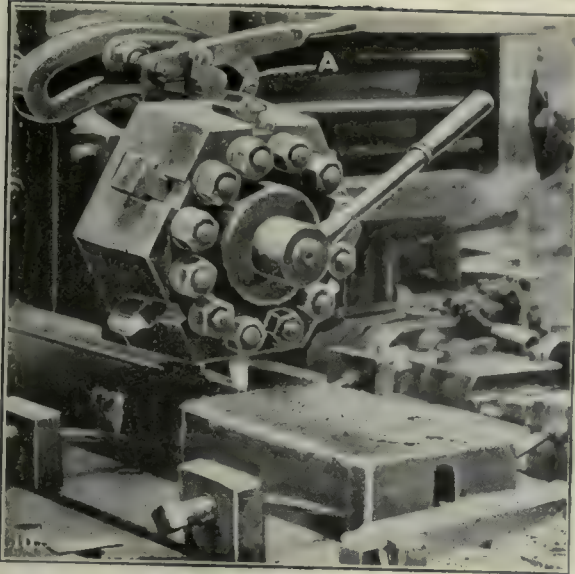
TURRET MOUNTED ON PLANER HEAD. FIG. 11—BOX FOR TRANSPORTING SMALL PARTS
